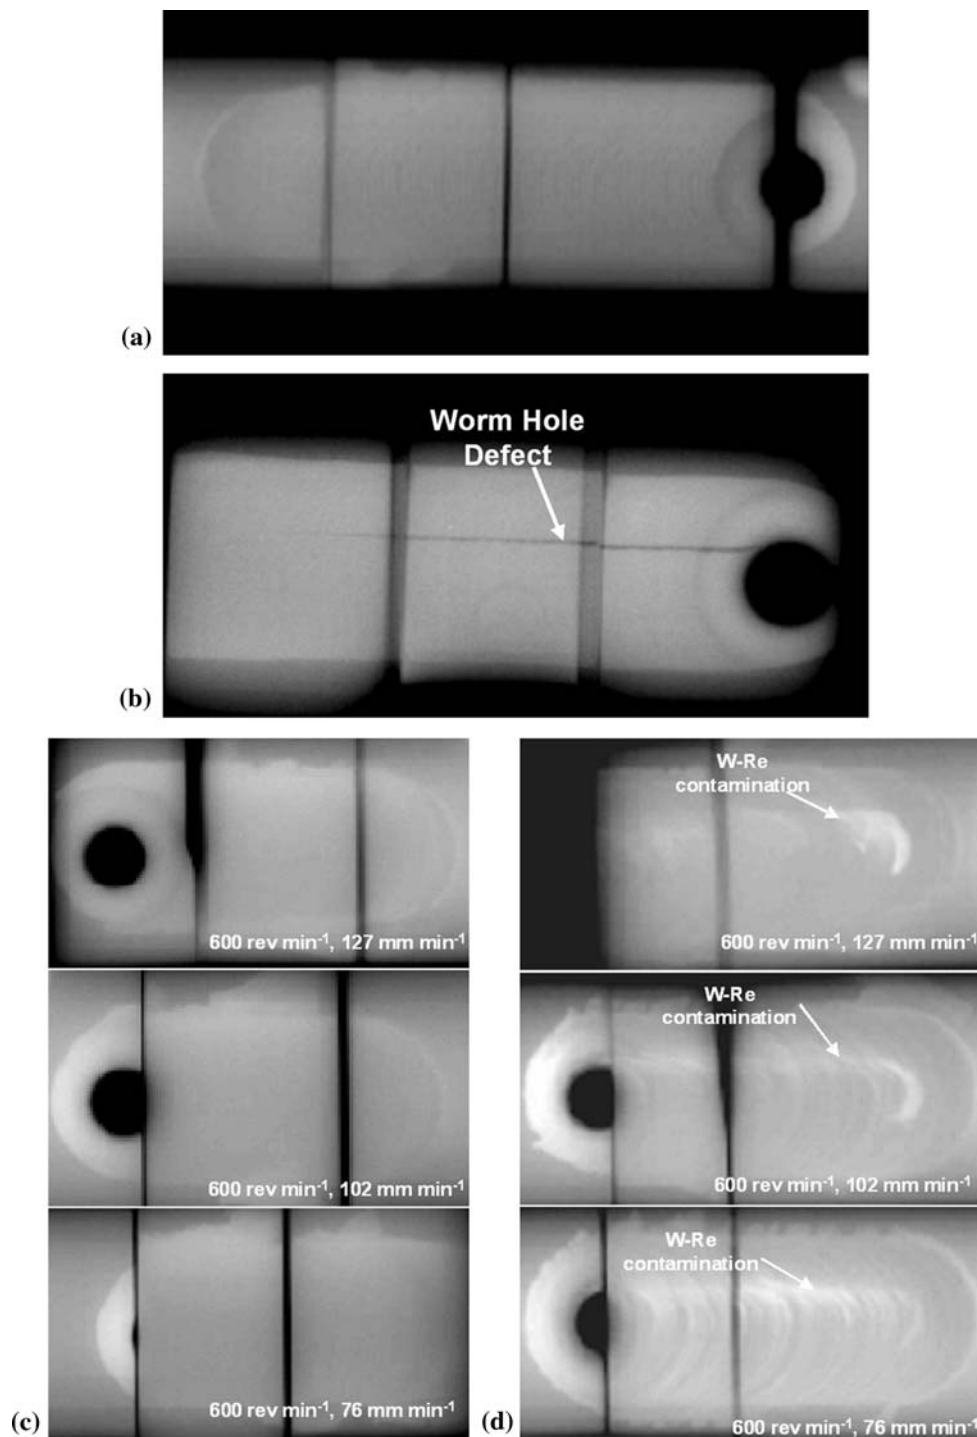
X-ray radiographic analysis of the friction stir welds showing: (a) defect-free weld when processed at 76 mm min^{-1} and 500 rev min^{-1} with PCBN pin tool; (b) wormhole defect when processed at 127 mm min^{-1} and 500 rev min^{-1} with PCBN pin tool; (c) good welds with no contamination when processed with PCBN tool; and (d) W-Re contamination in welds when processed with W-Re pin tool
